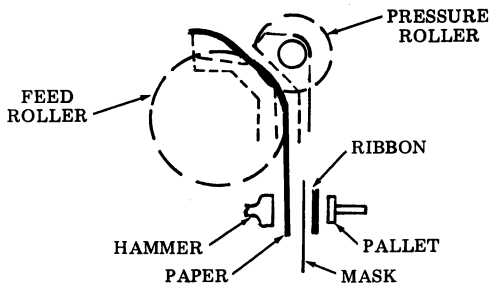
Friction Feed Printer Equipped With Noise-Reduction Parts
